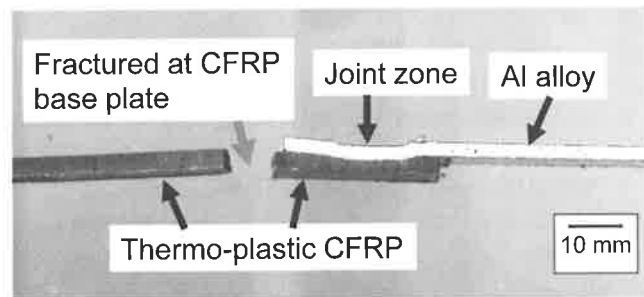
Appearance of dissimilar lap joint of A5052 Al alloy/thermoplastic CFRP by FLJ process after tensile shear test, which shows the fracture at CFRP base sheet.
